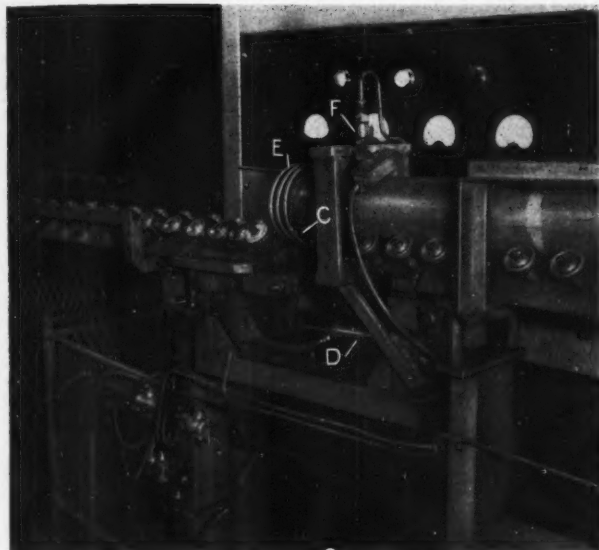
In this close-up view of the Delapena induction heating machine employed for annealing the tubes may be seen the inductor-coil, stop, and conveyor. The cycle is automatically linked to that of the swaging machine
